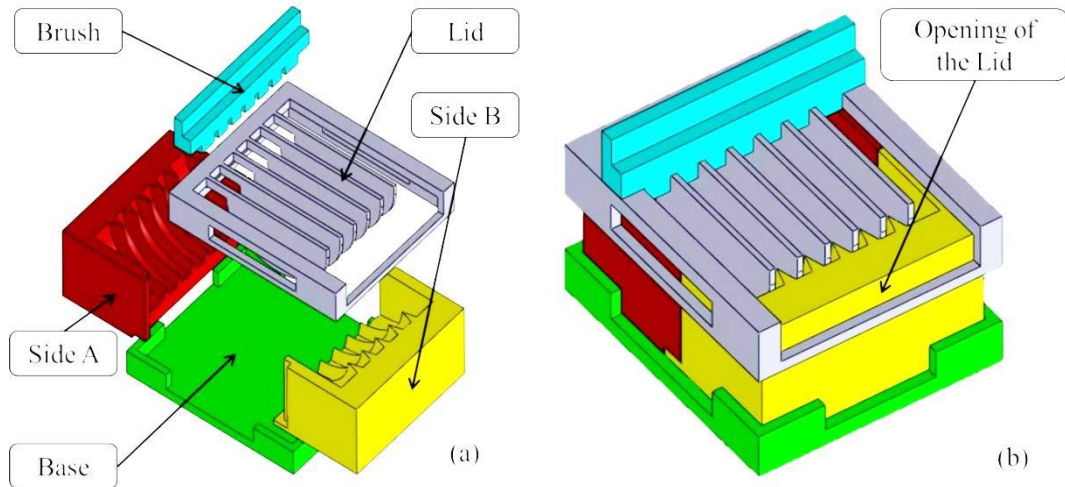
3D Model for Mold V2a for Creating Second Version Extension Mechanism, (a) Exploded View; (b) Assembly View
